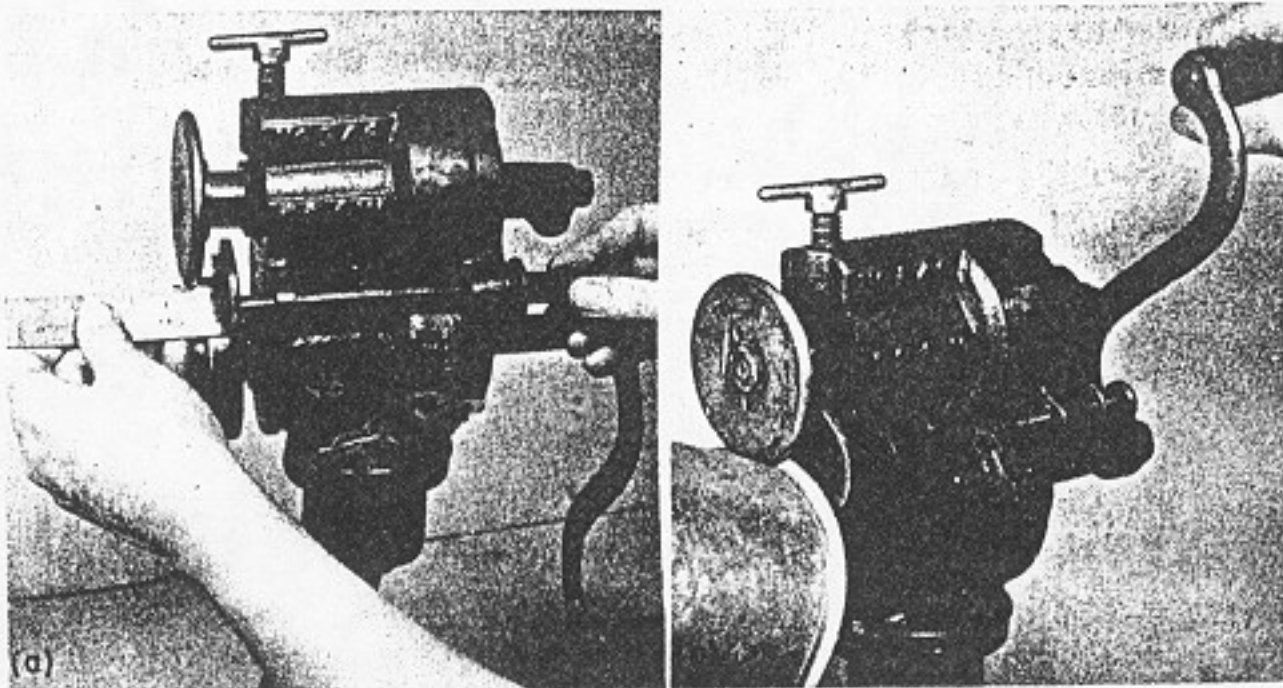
The setting of the gage is done easily and accurately when a rule is used.
